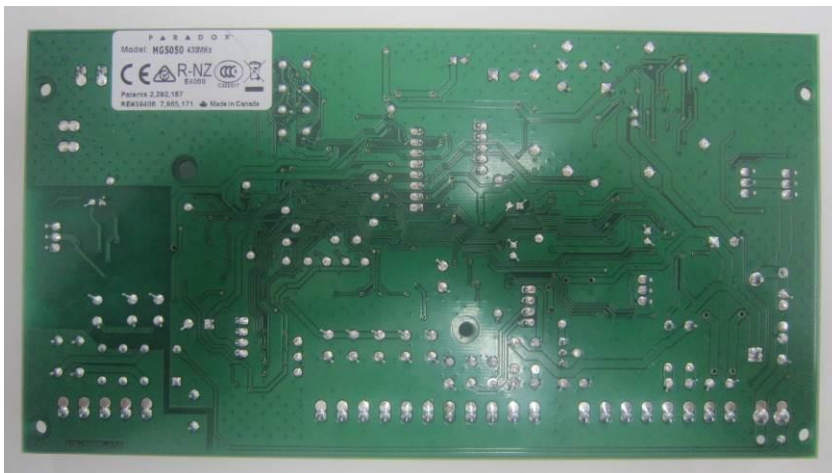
, 5.1.7 – SP5500 PCB view
